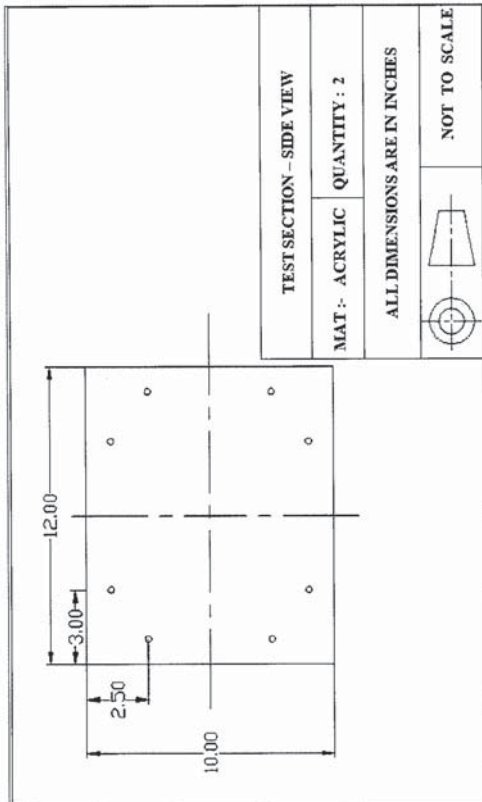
CAD DRAWING OF TEST SECTION - SIDE VIEW
